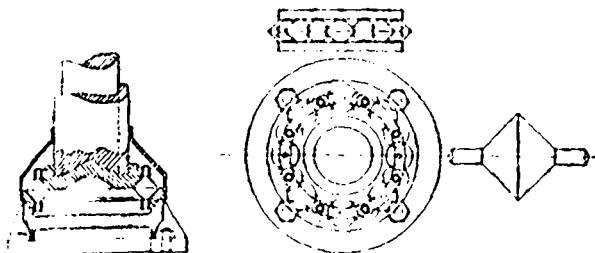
FIG. IV.—FOOT-STEP BEARING FOR MILL MACHINE.
